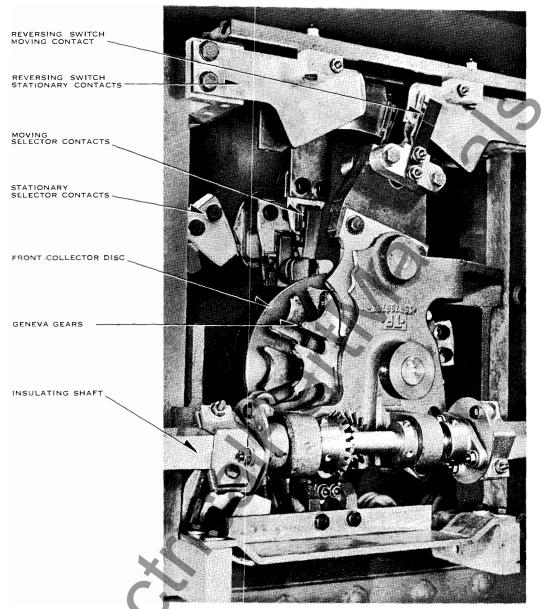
B. Sectional View of Type URS Selector Switch Assembly. OPERATING MECHANISM phase, reversible, capacitor-
